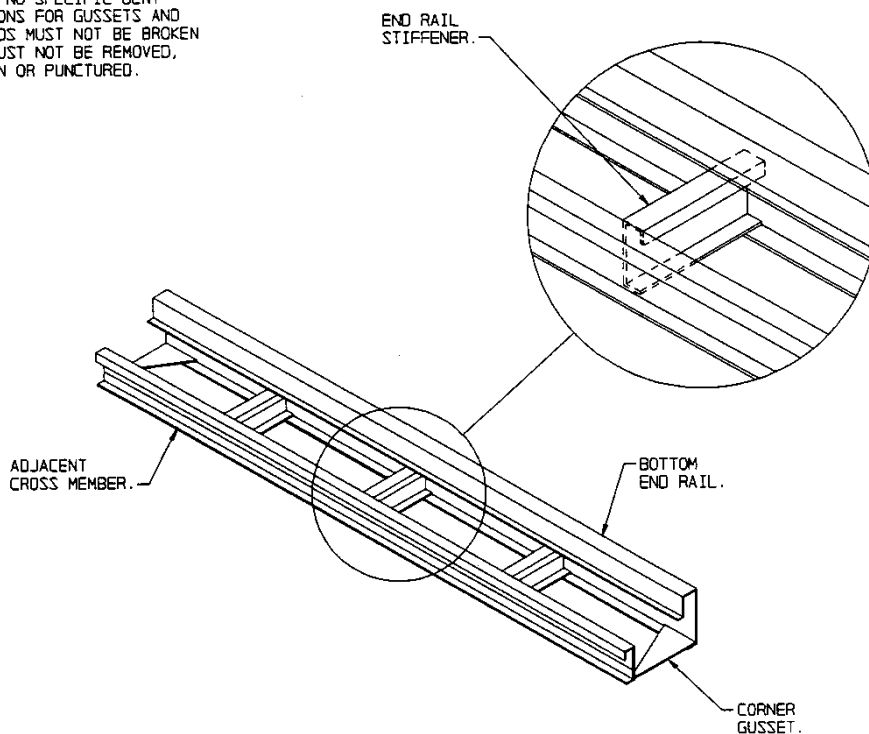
D - BOTTOM END RAIL (MILVAN)
